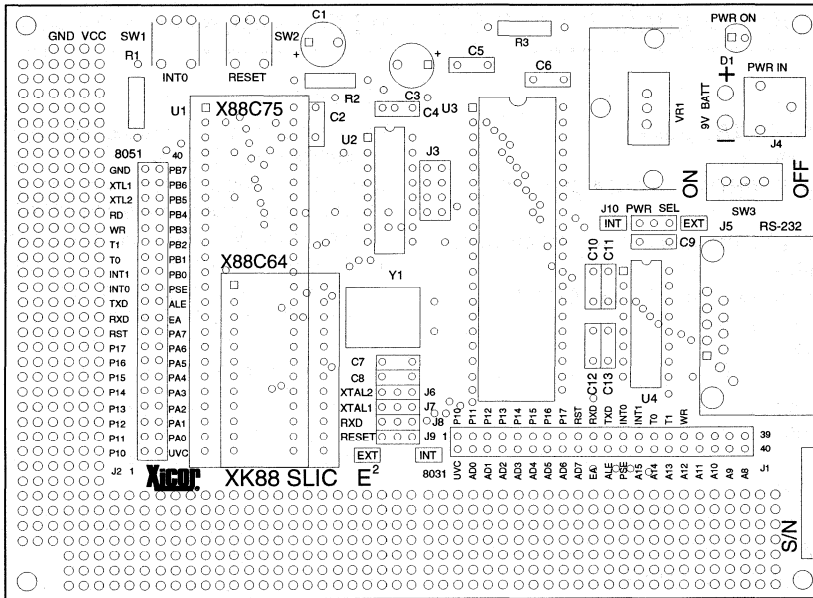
Development Board. Detail Views Show Default Factory Settings For J6, J7, J8, J9, and J10
